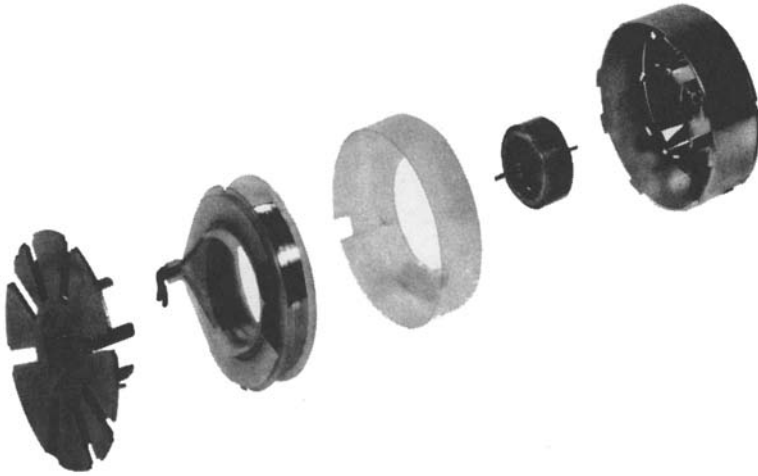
Exploded view of a single-phase synchronous motor with main and auxiliary pole teeth and permanent magnet rotor
